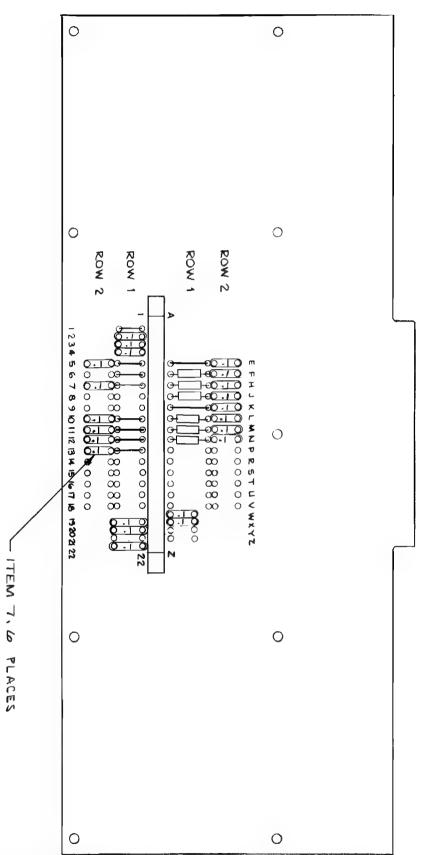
RF Shield PCB Assembly A006446-01 B
